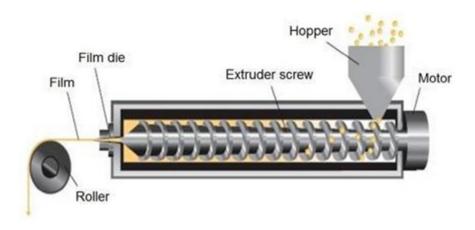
Manufacture of ODFs by Hot Melt Extrusion
